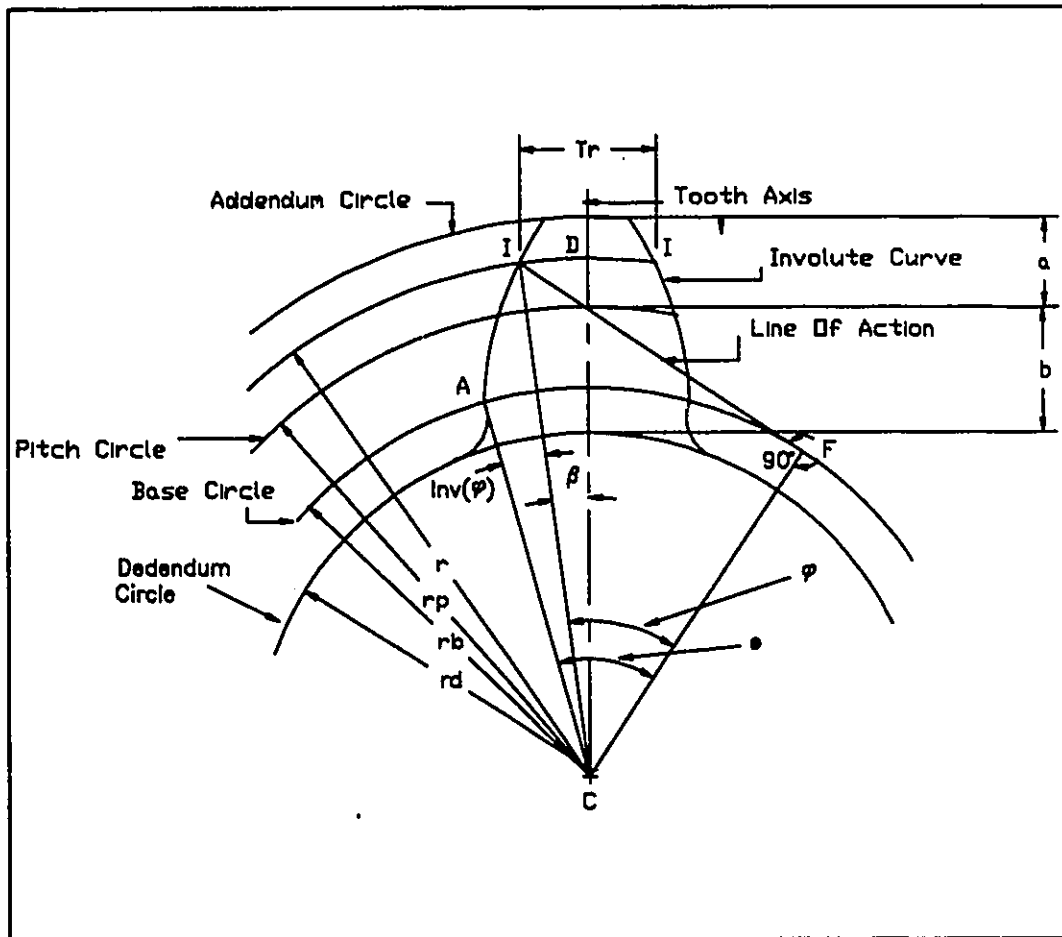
BASIC DIMENSIONS OF AN INVOLUTE TOOTH
